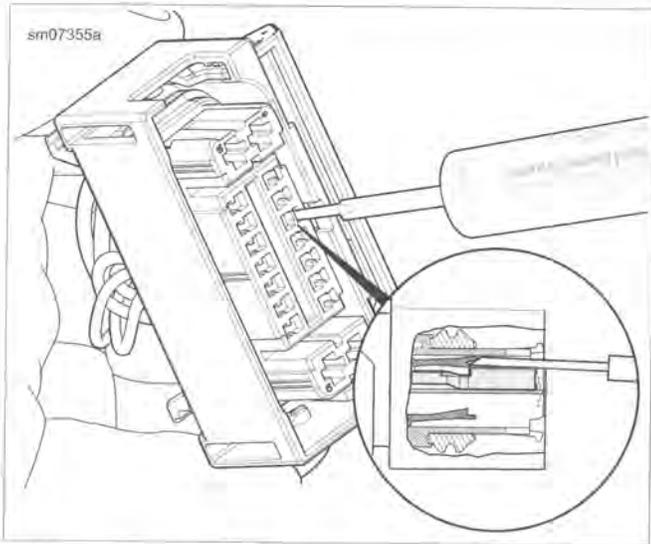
Removing Small Socket Terminal: Tyco MCP Connector
